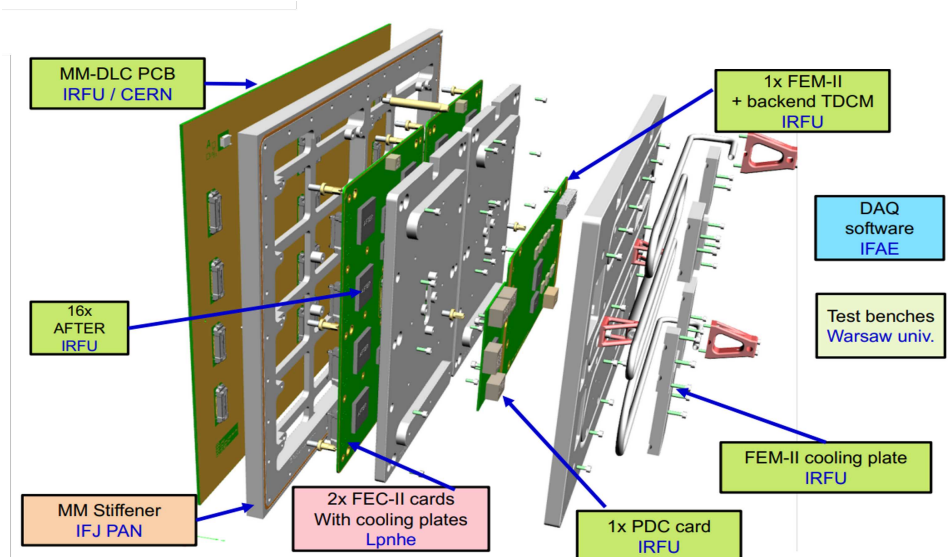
CAD-based drawing of the electronics fixed on the backside of the ERAM.
